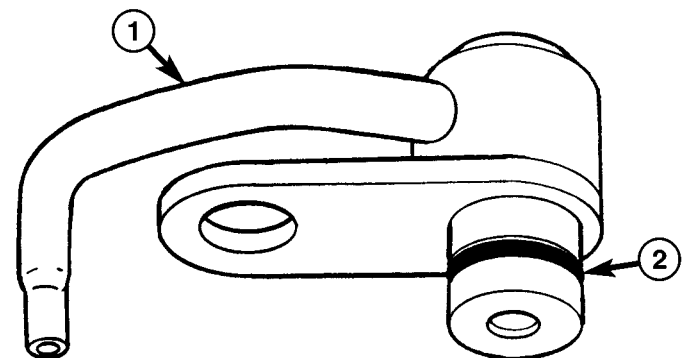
Oil Jet Fastener - 2.4L Turbo
